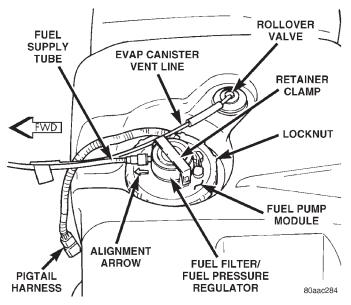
Fuel Tank/Fuel Pump Module (Top View)
